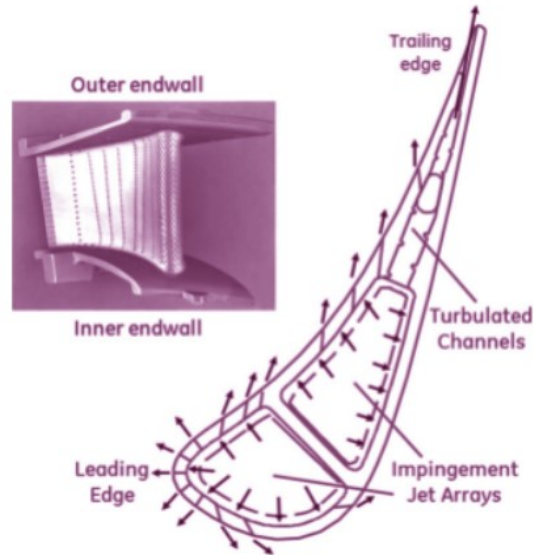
Steam Cooled NGV Design Examples [12].
